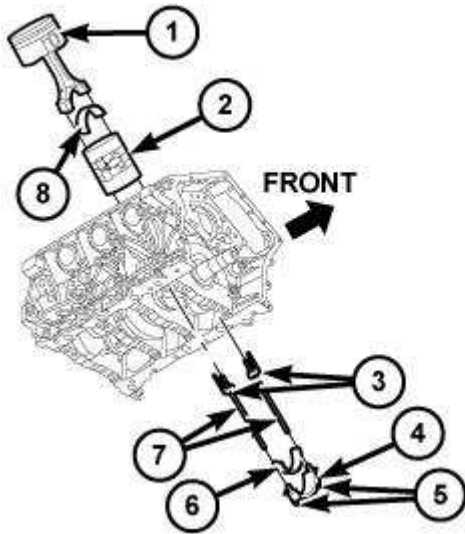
Piston, Connecting Rod Cap, Bolts, Plastic Guide Plates & Guide Pins
